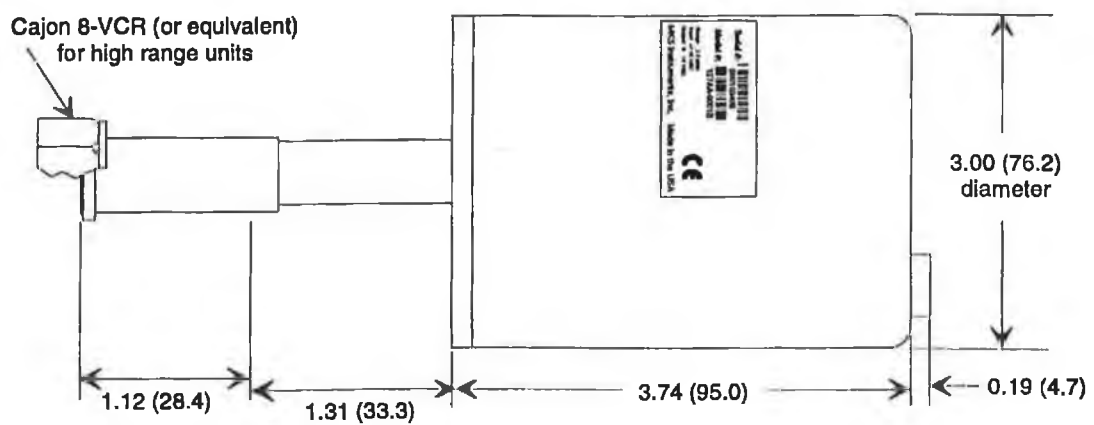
Dimensions of a High Range Type 127/128 Transducer
